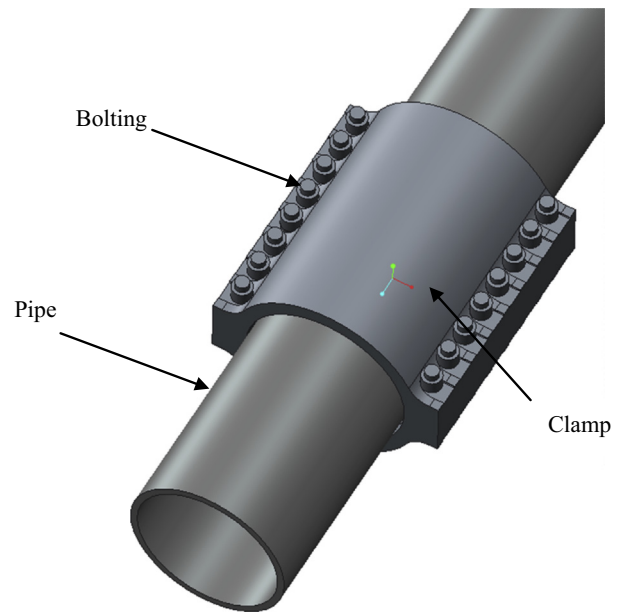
Schematic diagram showing components of the composite clamp assembly.
